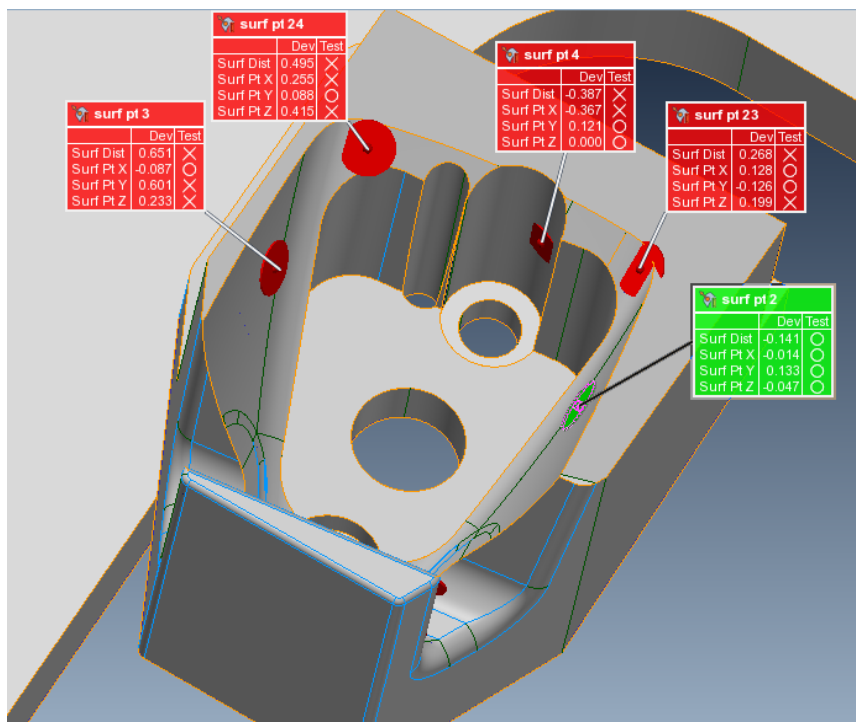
Picture from the CAD-drawing of the support bearing including the performed measurements on the V90-palette.
